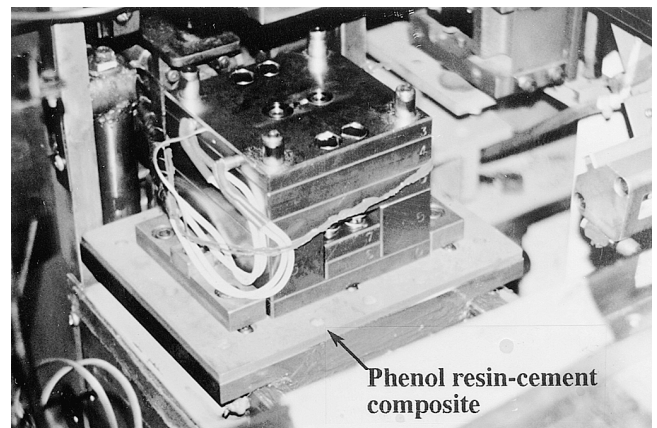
CAPR composite insulators in operation in an injection molding machine.
